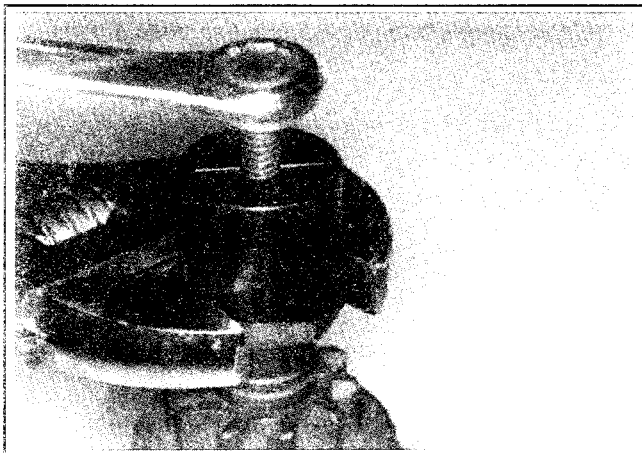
Holding Tool and Turning Center Screw (Clockwise) to Remove Retaining Ring.
